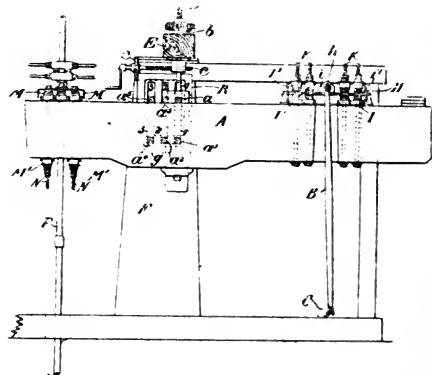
and 2 show respectively a side view and a front view of the apparatus, both views being partly in section.
